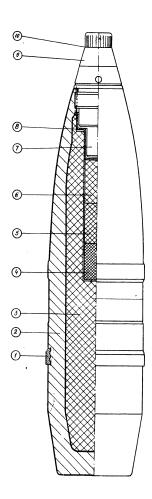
HIGH EXPLOSIVE SHELL »HE-OF-350«
